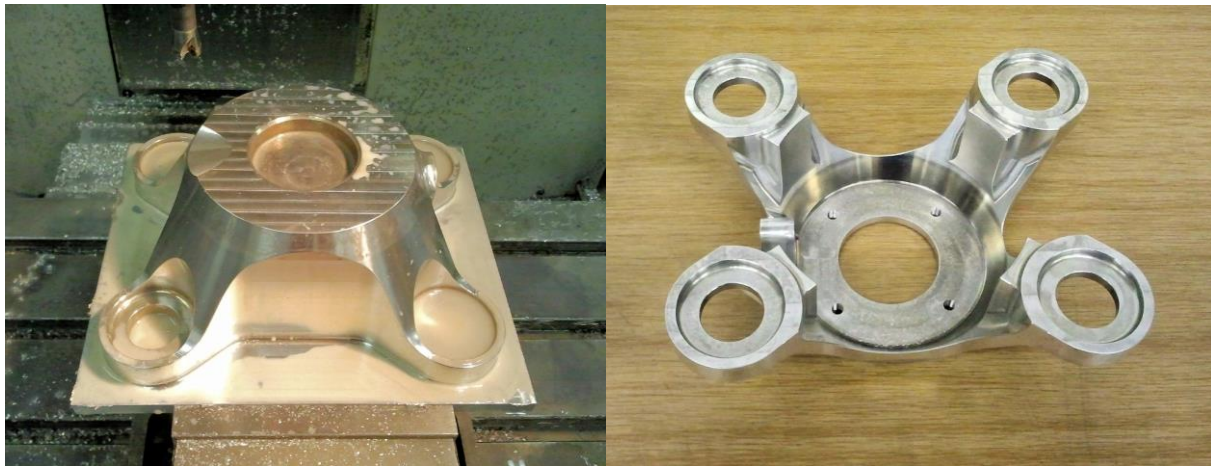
UAV ENGINE MOUNT AFTER FIRST MACHINING SETUP (LEFT) AND ONCE COMPLETE (RIGHT).
